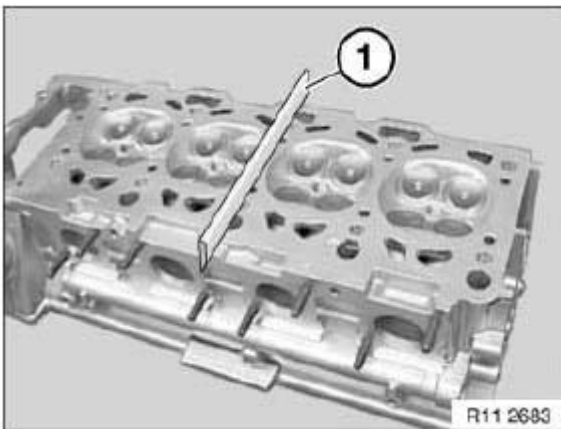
Checking Evenness Of Cylinder Head Sealing Face With Standard Straight-Edge
